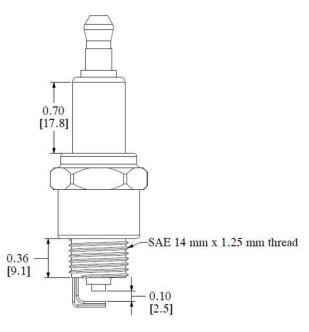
S-22. Dimensioned Drawing of a Spark Plug
